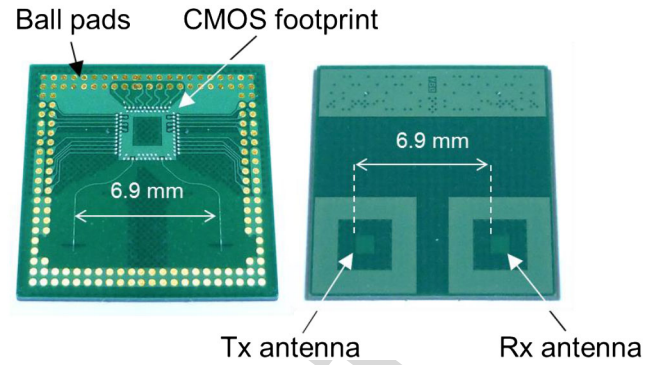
Picture of the BGA-module version 2: bottom view on left and top view on right. F1:1 F1:2
